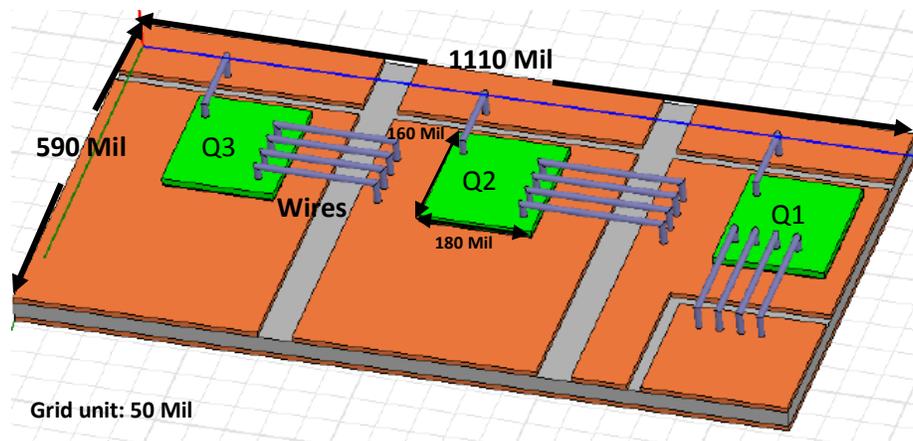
Layout of the three series-connected MOSFETs wire-bonded module (layout dimensions in Table 3.1) in Ansoft® Q3D extractor.
